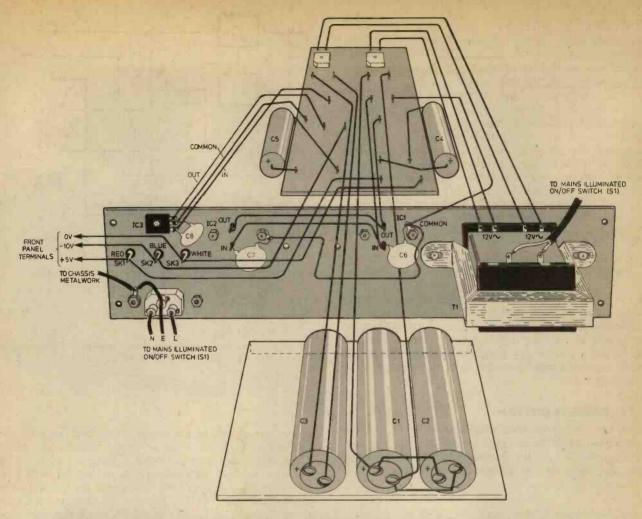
Exploded view and wiring layout of CHAMP power supply. The p.c.b. and the large electrolytic support plate are both mounted on the CHAMP back-plate
